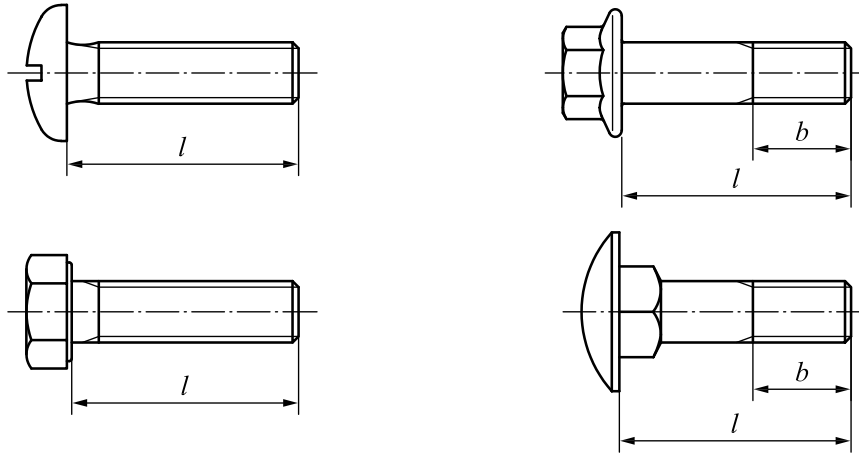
Length for bolts and screws with effective bearing surface perpendicular to the axis
